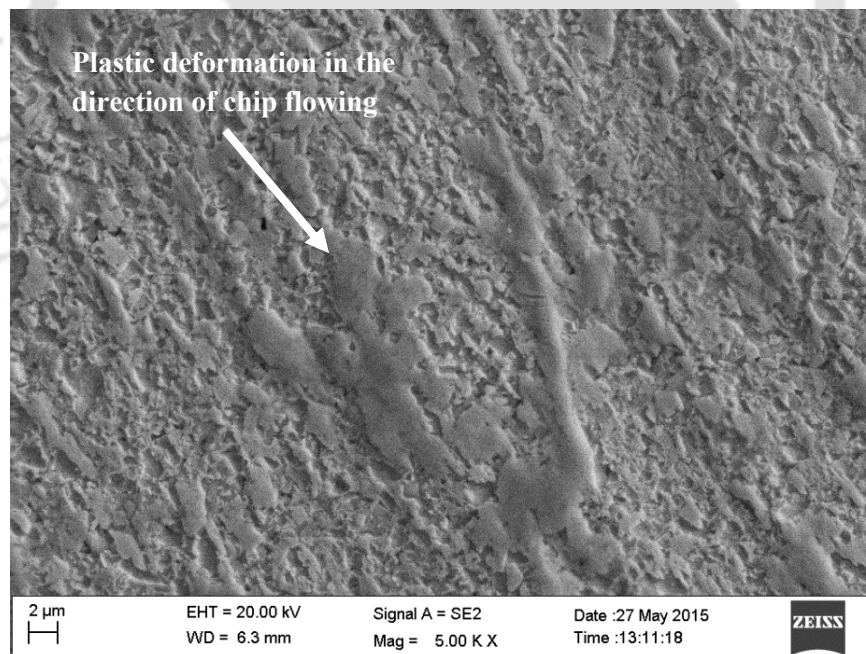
(b) Close up view of the rake surface of the commercial cutting tool
